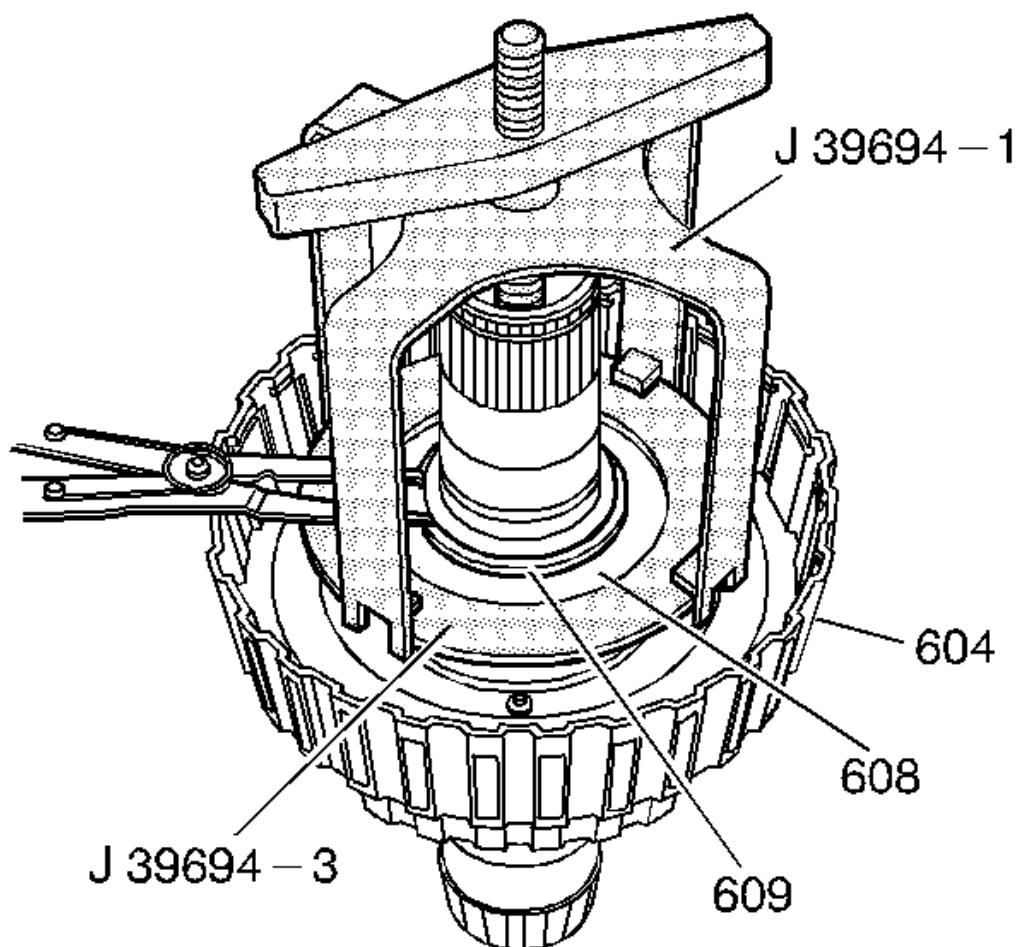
Identifying Clutch Spring Compressor & Compress Spring With J 39694
